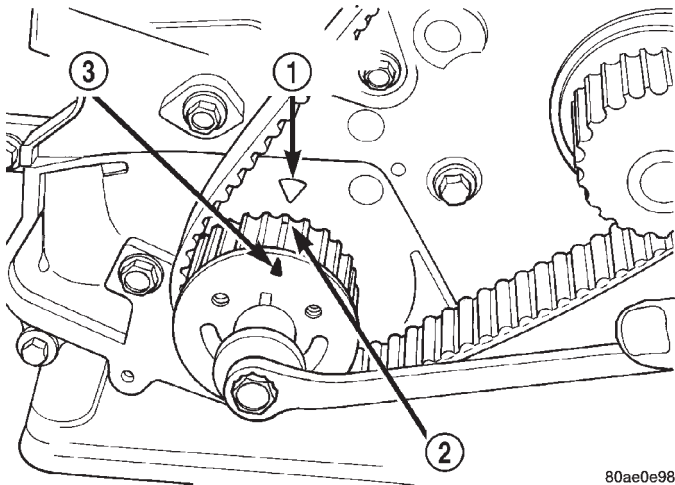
Adjusting Crankshaft Sprocket for Timing Belt
